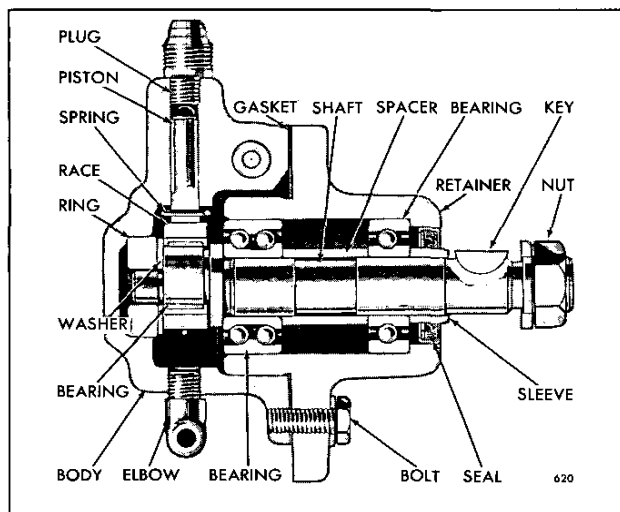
Belt-Driven Hydrostarter Charging Pump
